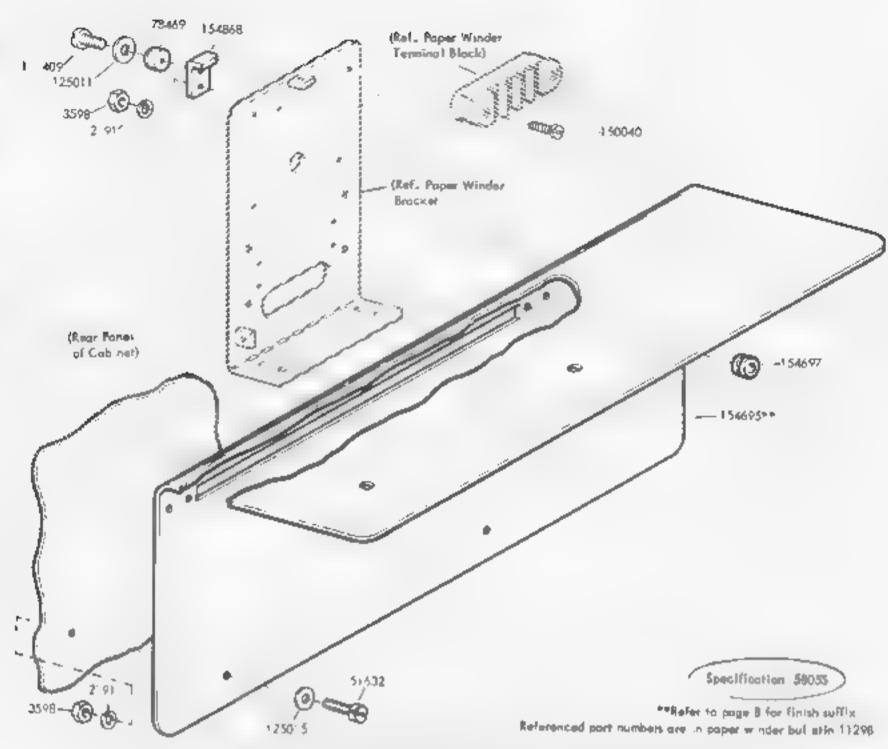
153901 MODIFICATION KIT TO PROVIDE A SHELF FOR MOUNTING A PAPER WINDER TO CABINET
